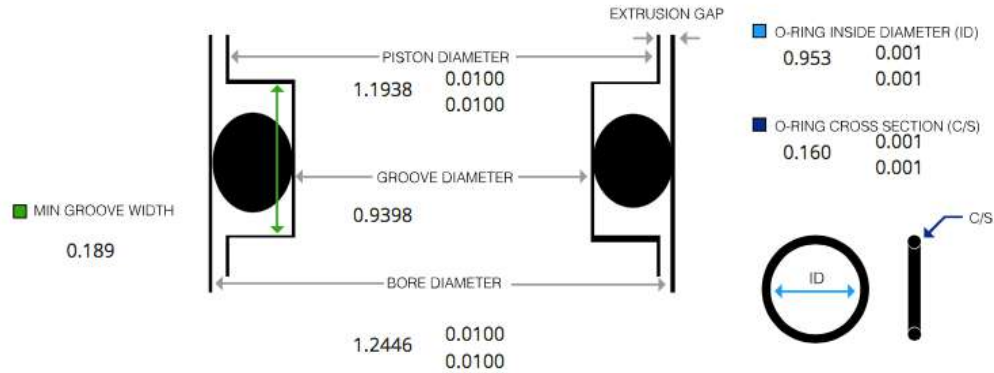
Schematic of a Design for the O-ring Gland for the Piston Head [8]
